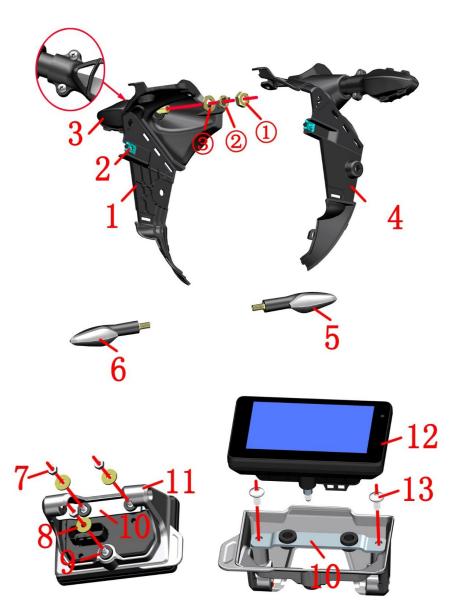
F	FRONT FORK	Head and headlights component 4	CHK	40)
